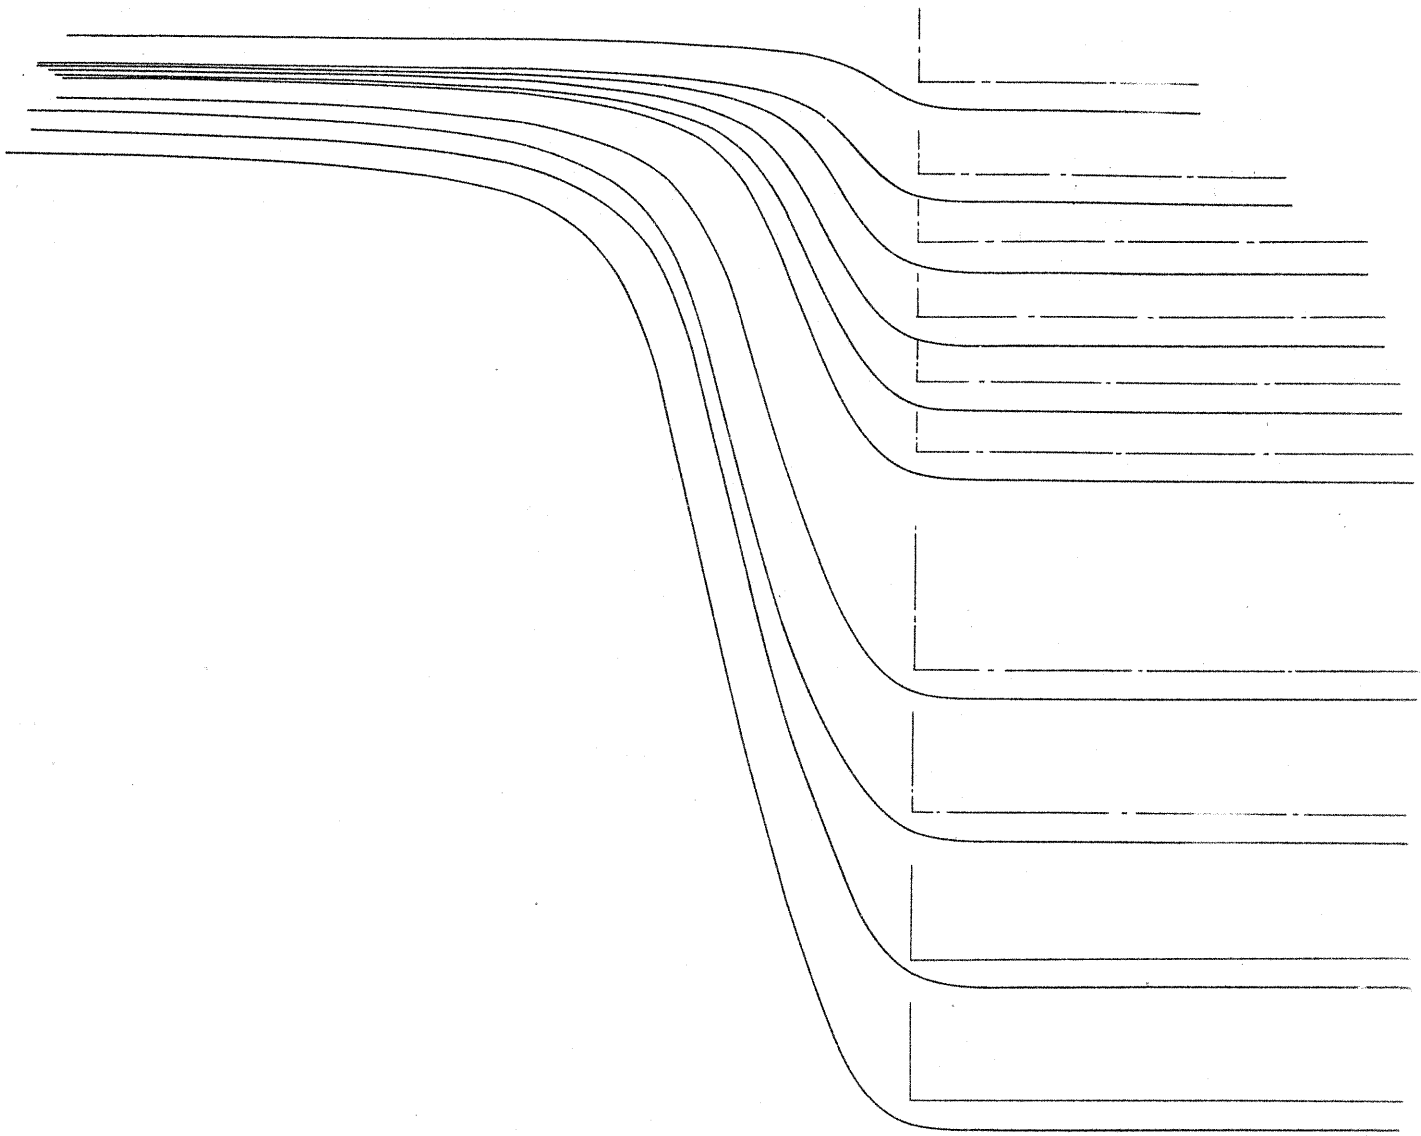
WORKPIECE PROFILES DURING MACHINING
